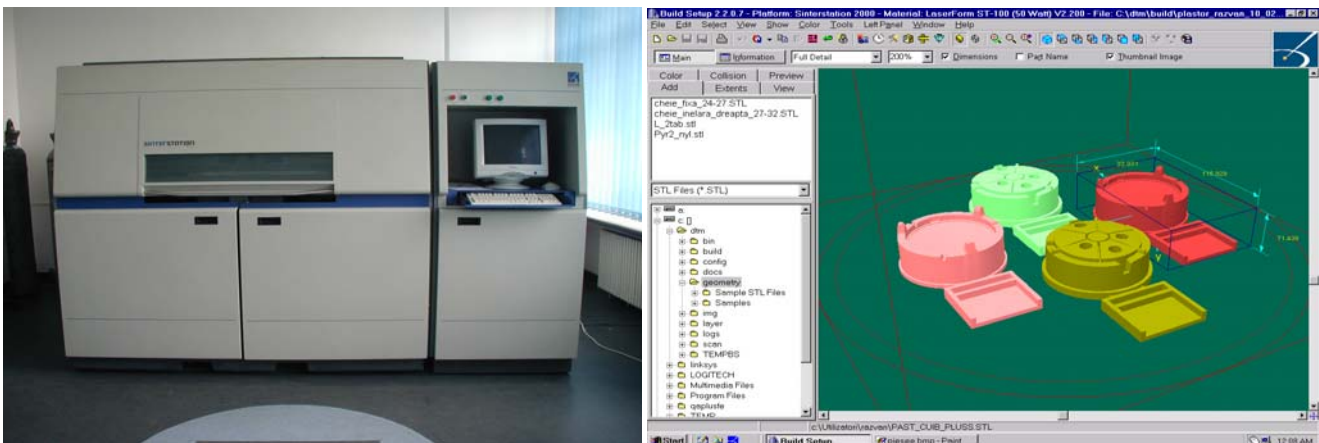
SLS Rapid Prototyping equipment (TUCN)
